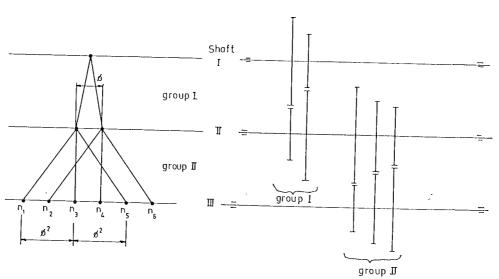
a Kinematic Arrangement Diagram of 6 Speed 3 Shafts Gearbox
